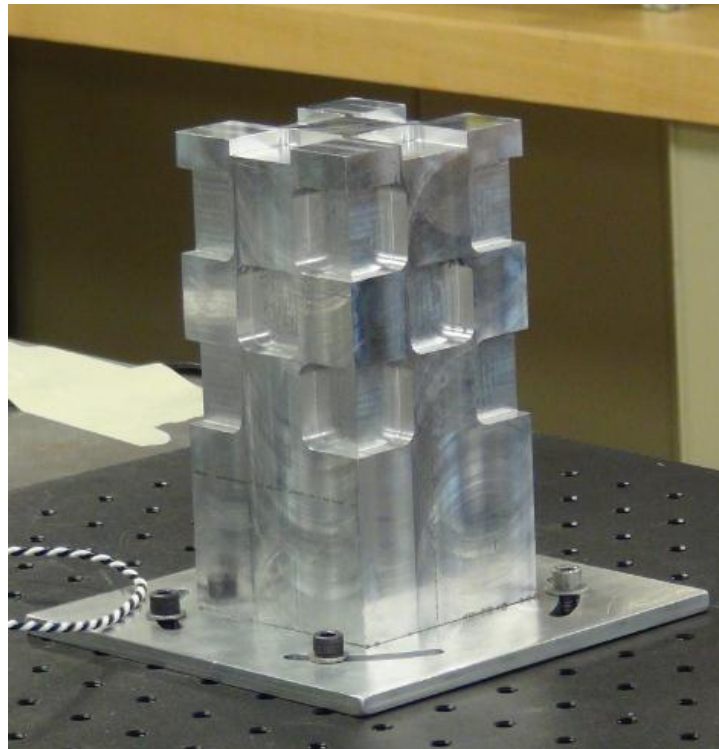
Gauge block assembled and mounted to an optical breadboard.
